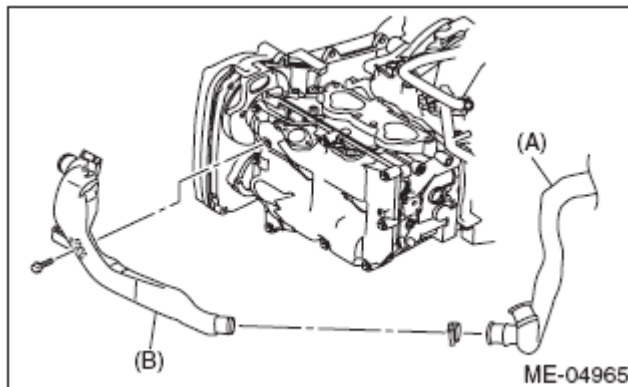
Identifying Rocker Cover LH Air Ducts (A And B)
